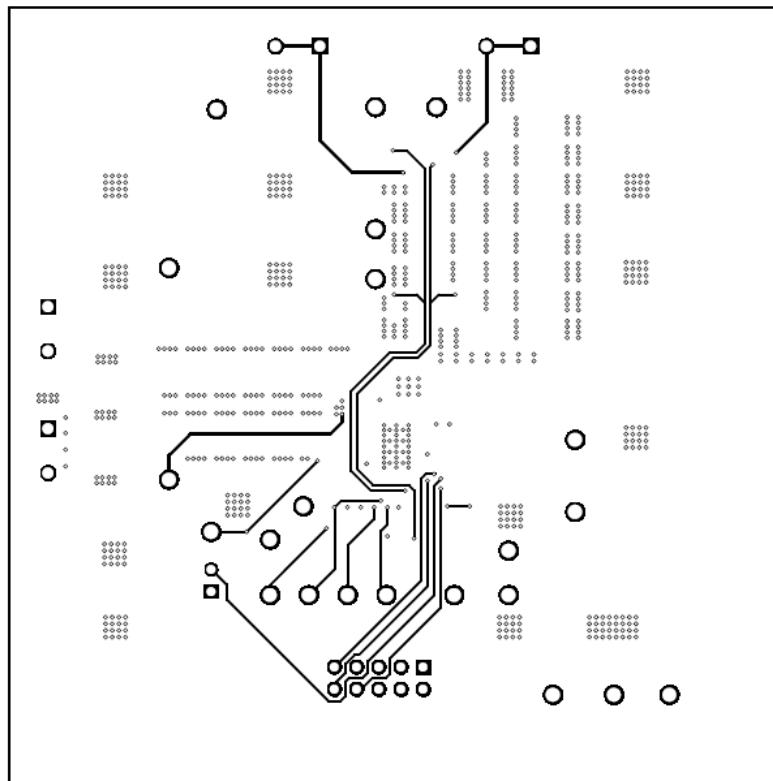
PWR-784EVM Inner Layer 2 (Top View)
